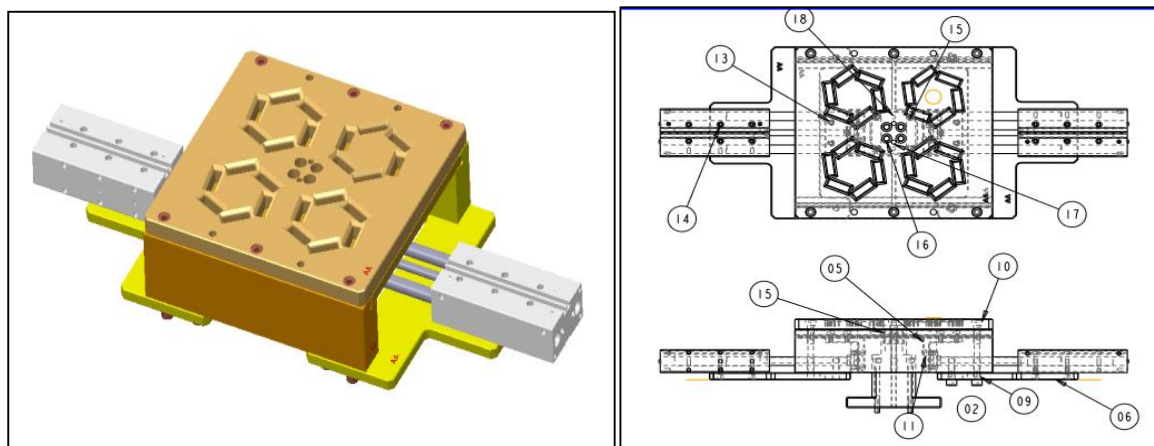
(a) Staging Fixtures and Sliding plates Figure 3.1(b) 2D View of Fixtures & Sliding plates
